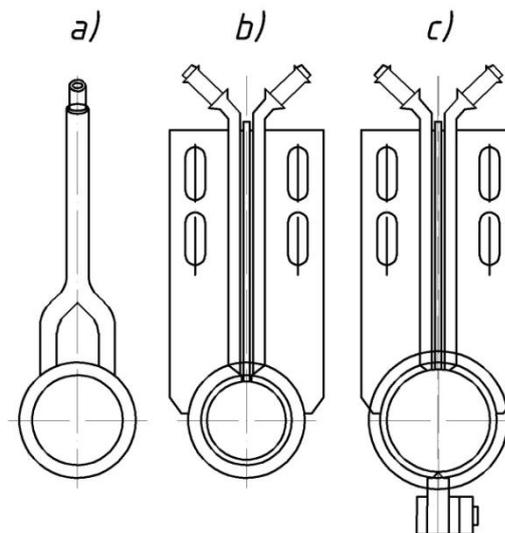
Designs of inductors for welding longitudinal pipes:
